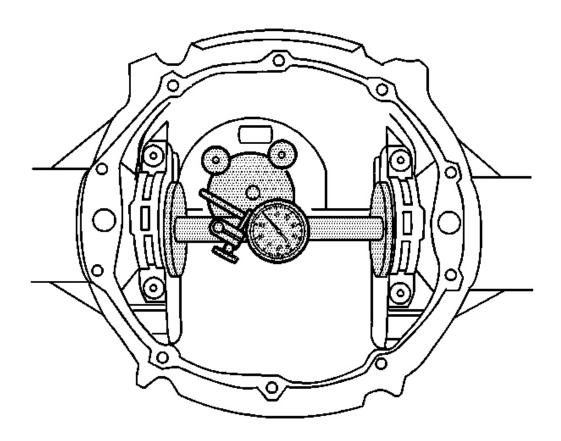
Moving The Housing J 8001 Courtesy of GENERAL MOTORS CORP.
